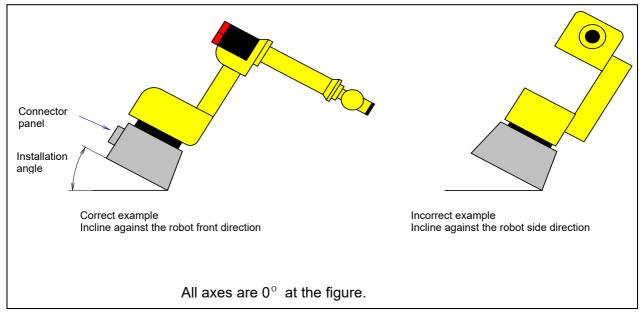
(a) Direction of robot wall mount and inclination installation
